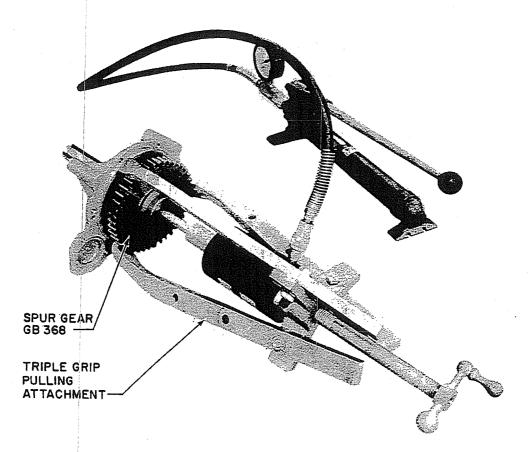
1 to 1 Shaft, Removal of Spur Gear GB368
